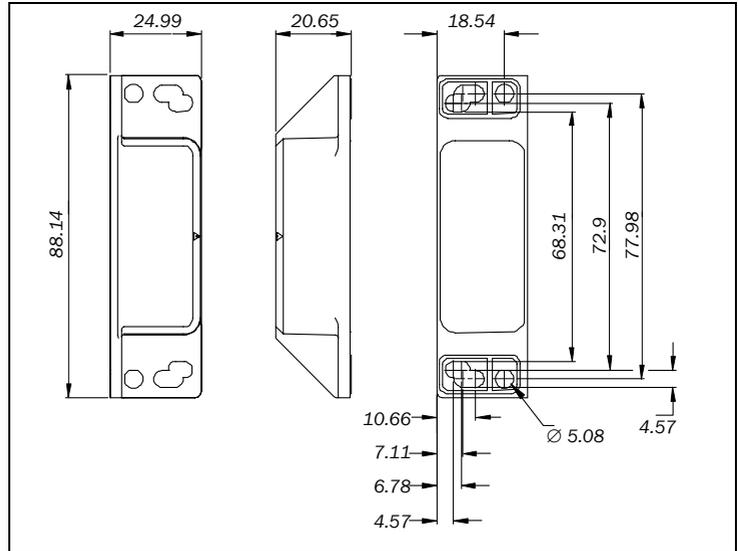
Dimensional drawing TR4 Direct sensor (mm)
